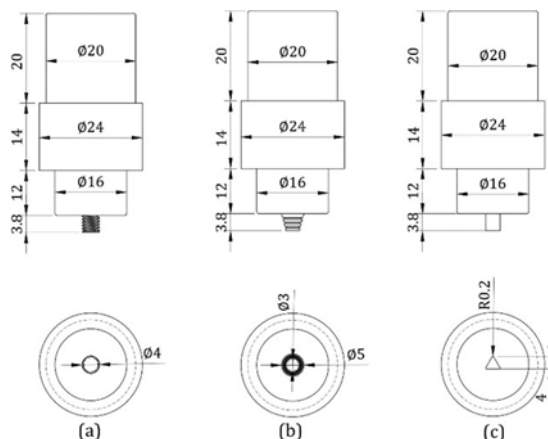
(a) Threaded Cylindrical (b) Tapered Grooved Cylindrical (c) Triangular
